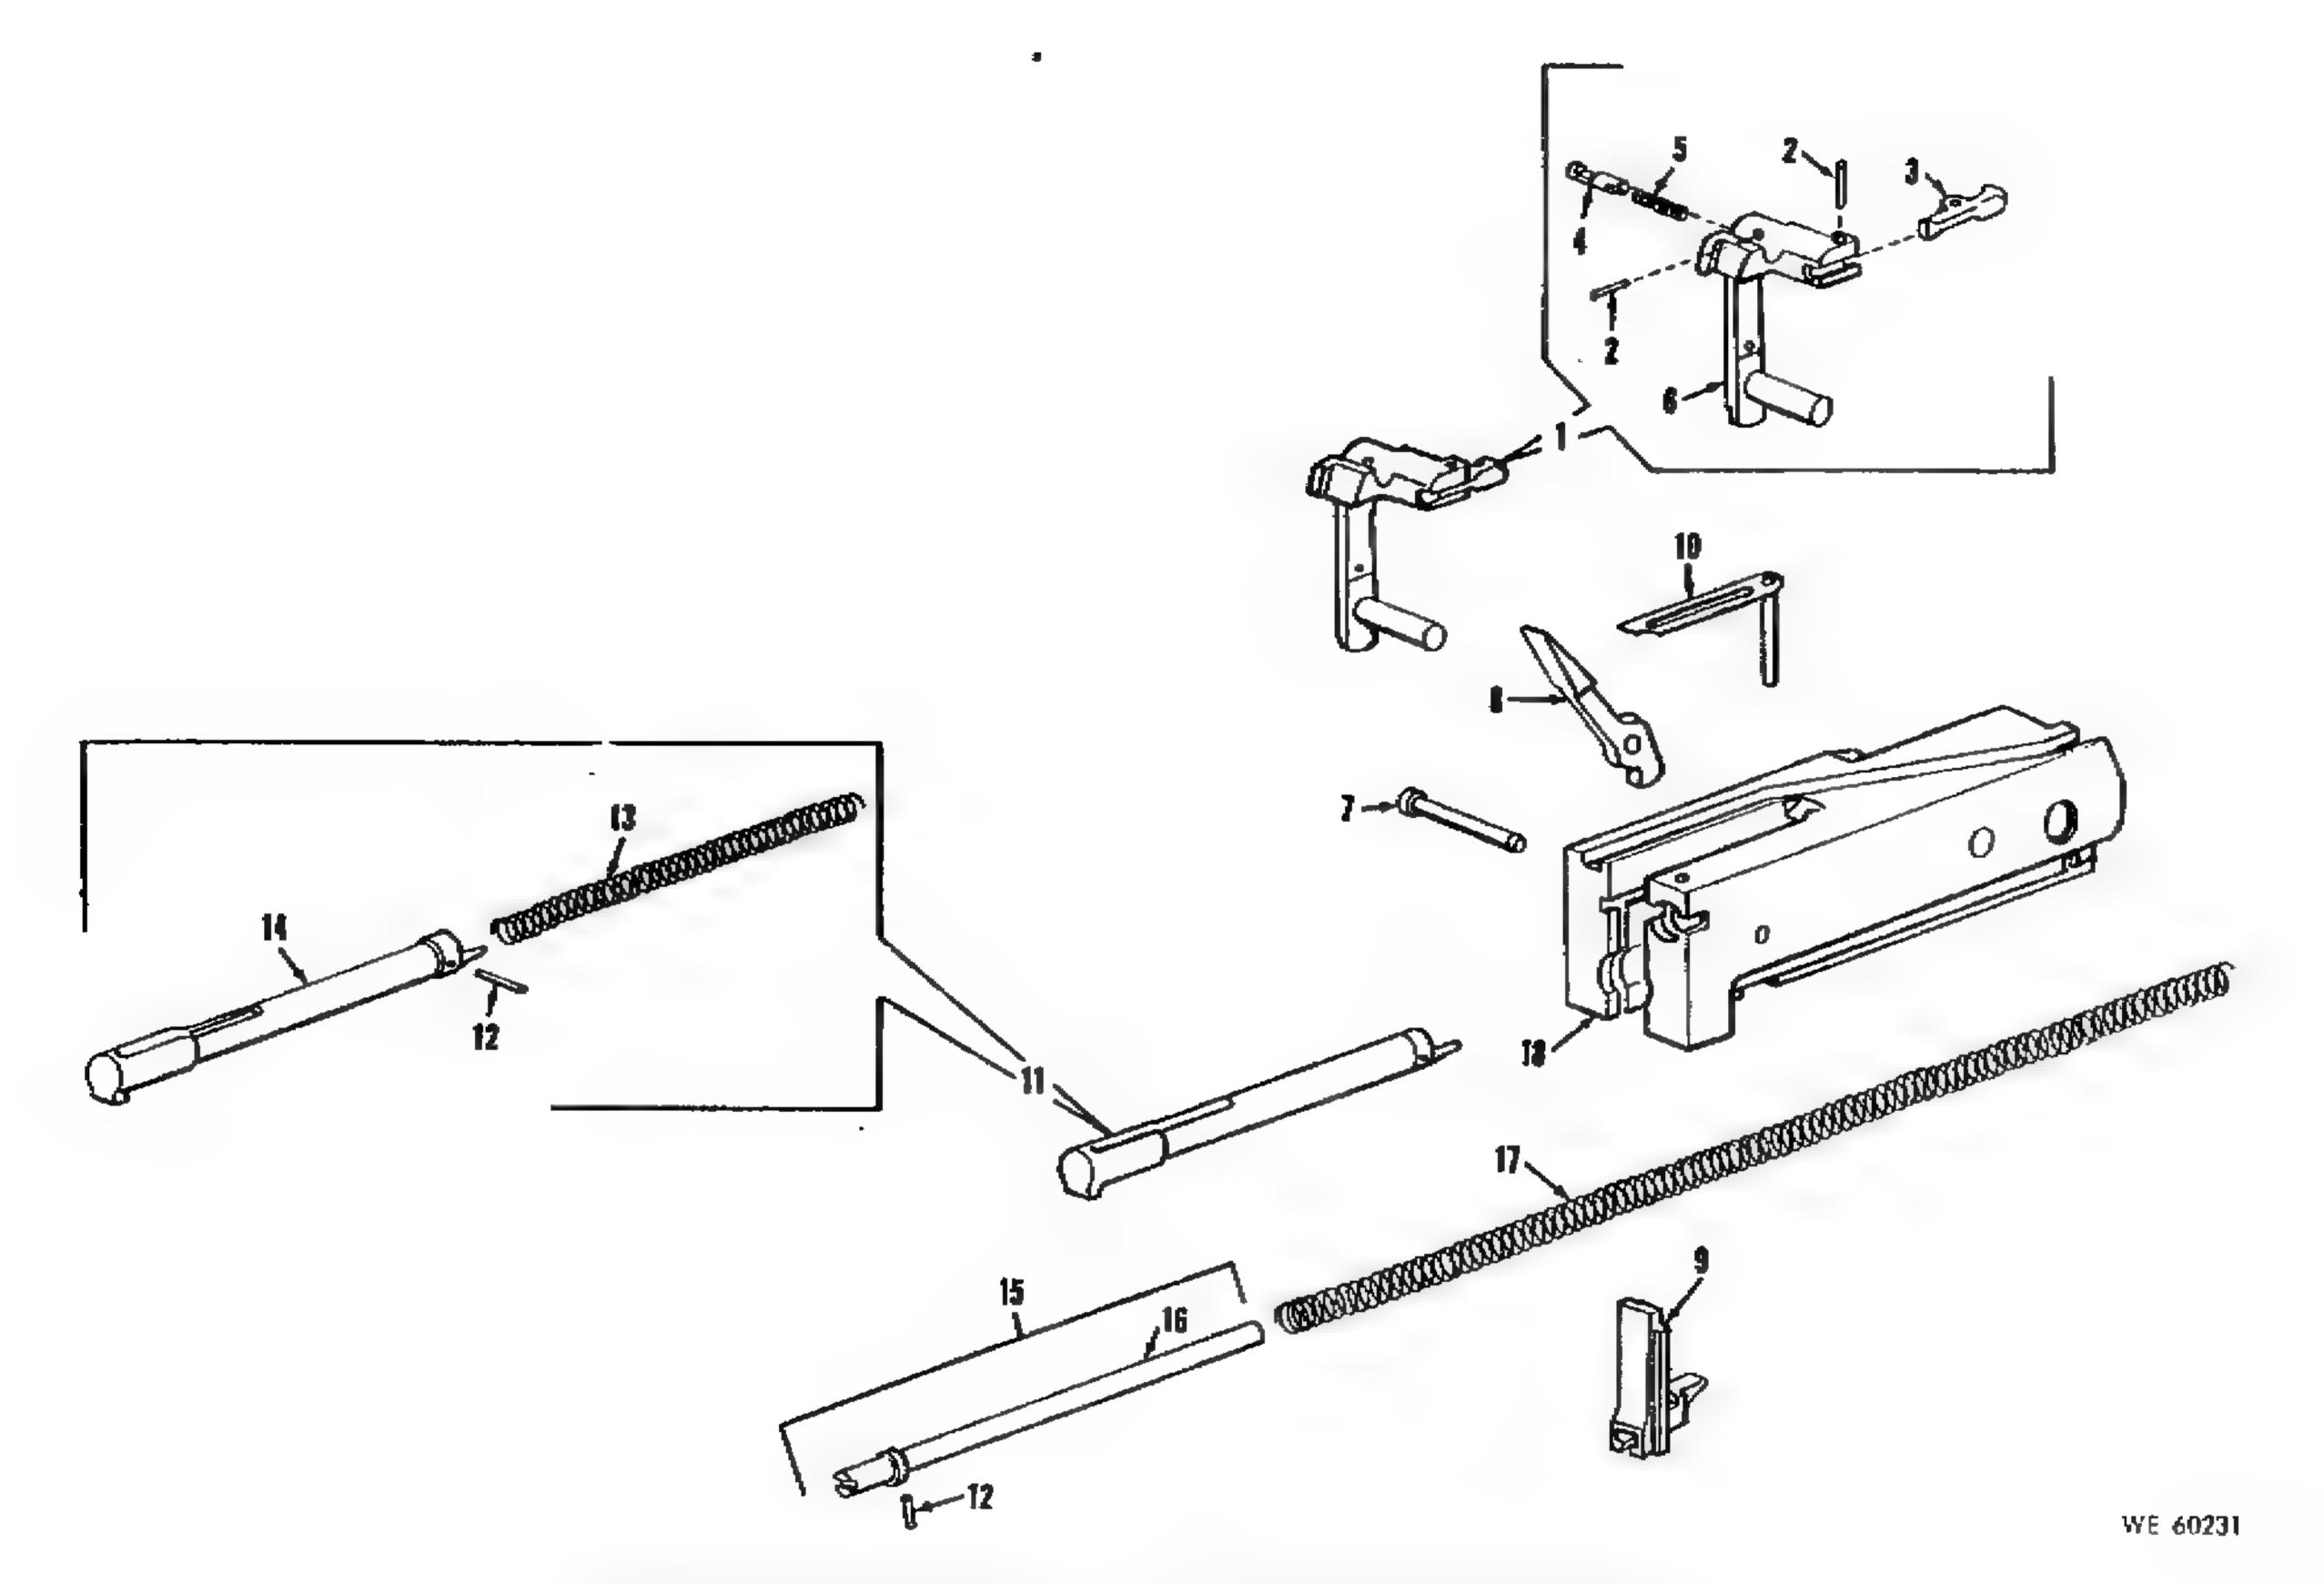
Bolt group for Caliber 30 Machine Guns, M1919A4 and M1919A6 only—exploded view.
